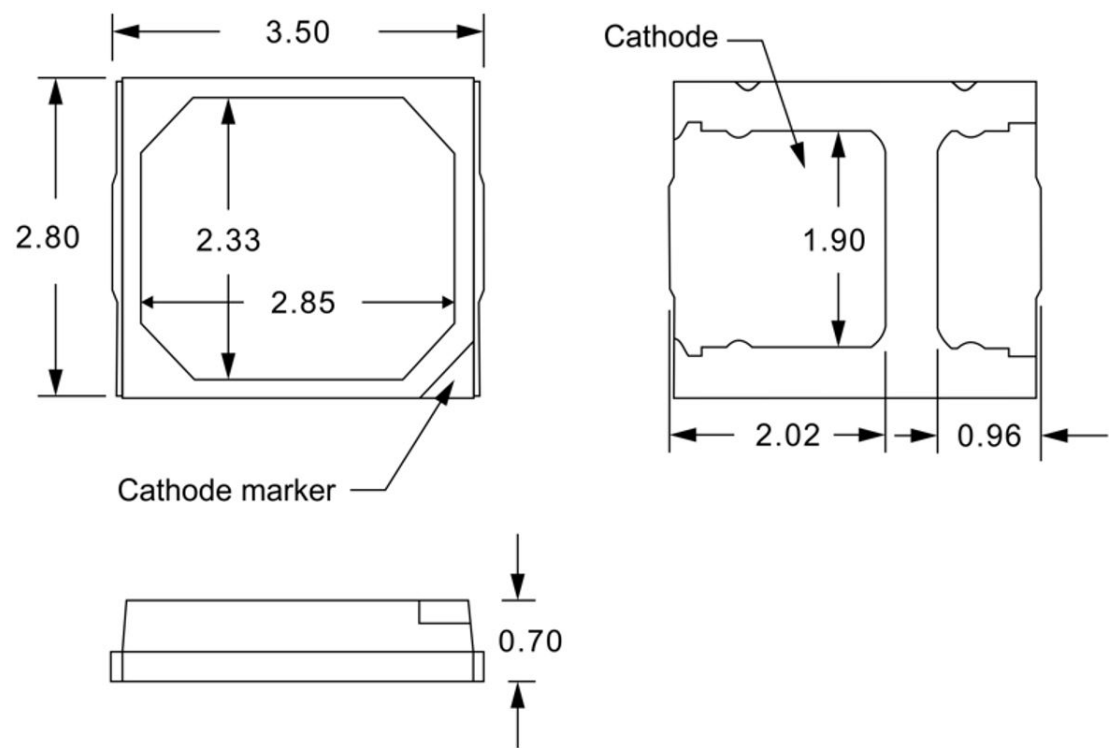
Mechanical dimensions for LUXEON 2835 Commercial Deep Dimming
